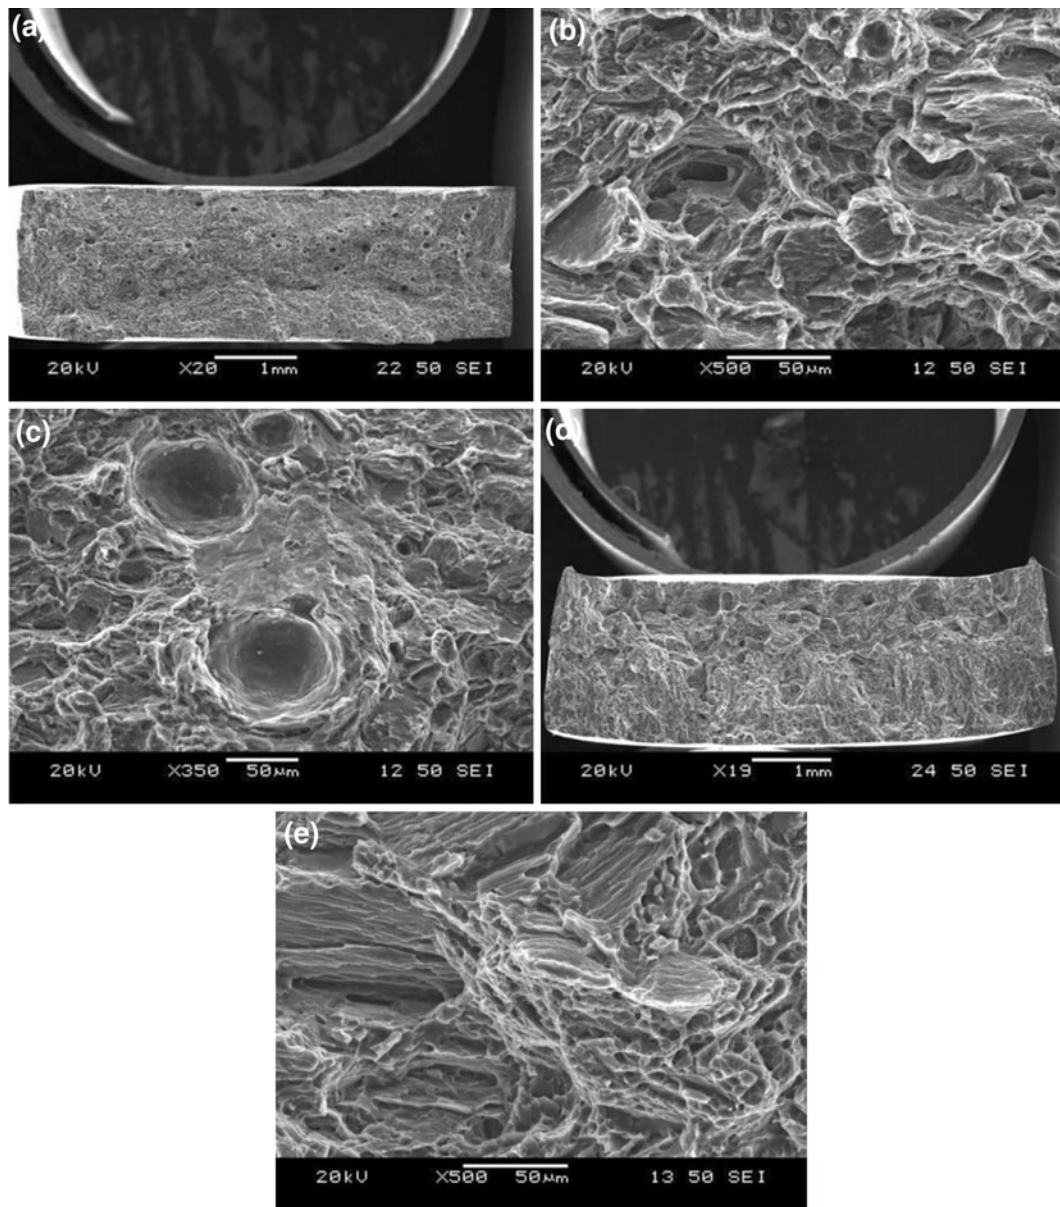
Typical SEM images showing the fracture surfaces after tensile testing at a strain rate of $1 \times 10^{-5} \text{ s}^{-1}$, (a) overall view of the entire fracture surface and (b) and (c) magnified view at higher magnifications of a FLW sample, (d) overall view of the entire fracture surface, and (e) magnified view at a higher magnification of a DLW sample.
